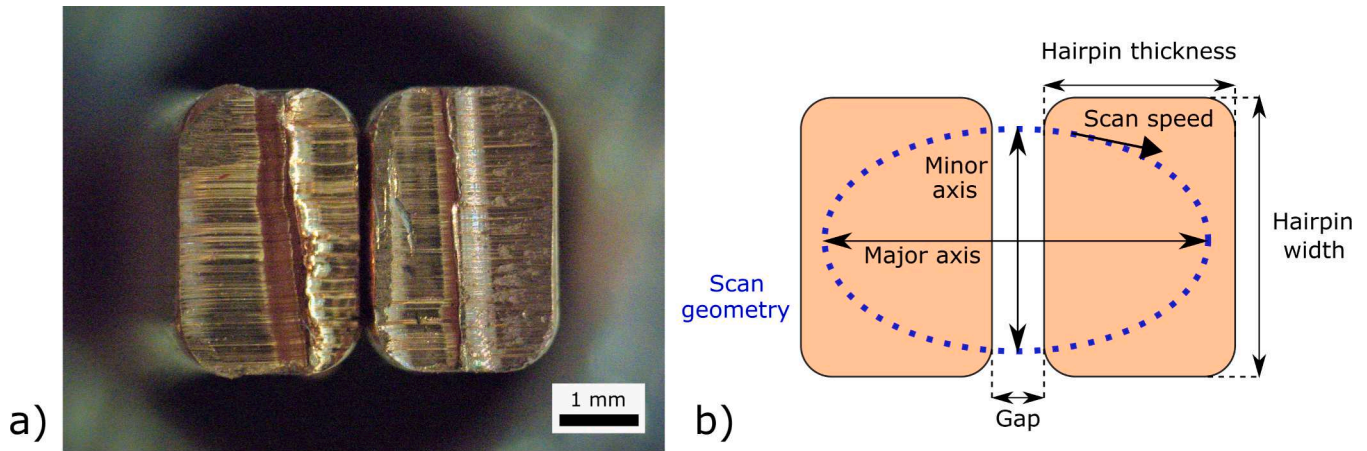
a) Top view of the hairpins positioned in the clamping system and b) schematic view of the scan geometry.
